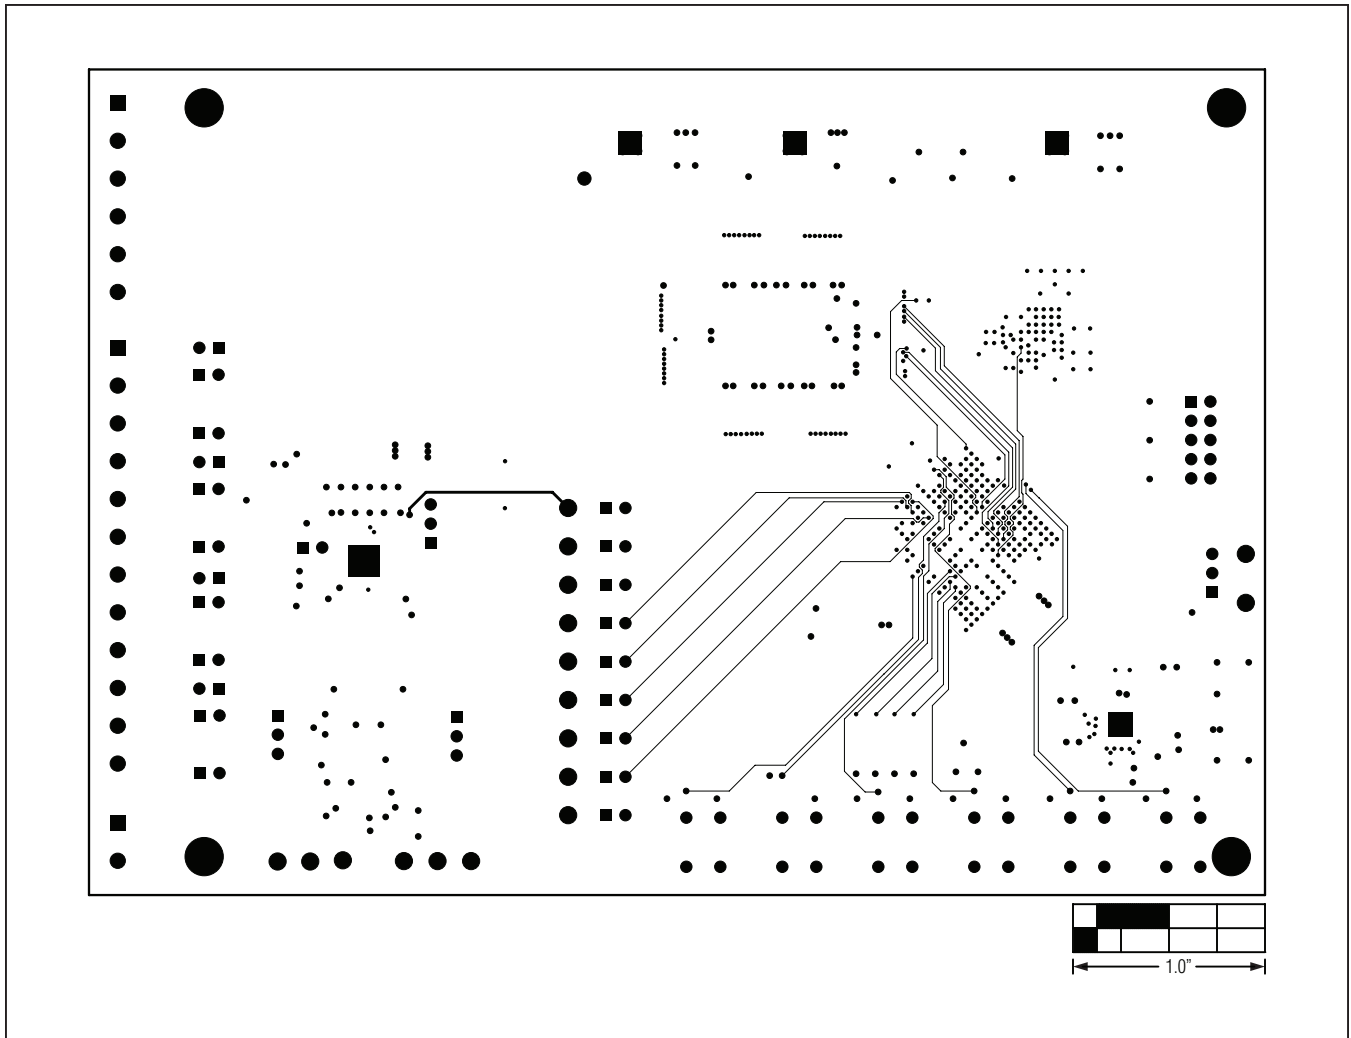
MAX11043 EV Kit PCB Layout—Signal Layer 9
